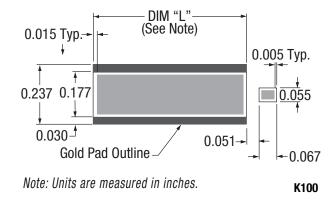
6 mm (SP) Coaxial Resonator Footpad Dimensions
